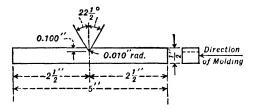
Simple beam (Charpy) impact test specimen.
